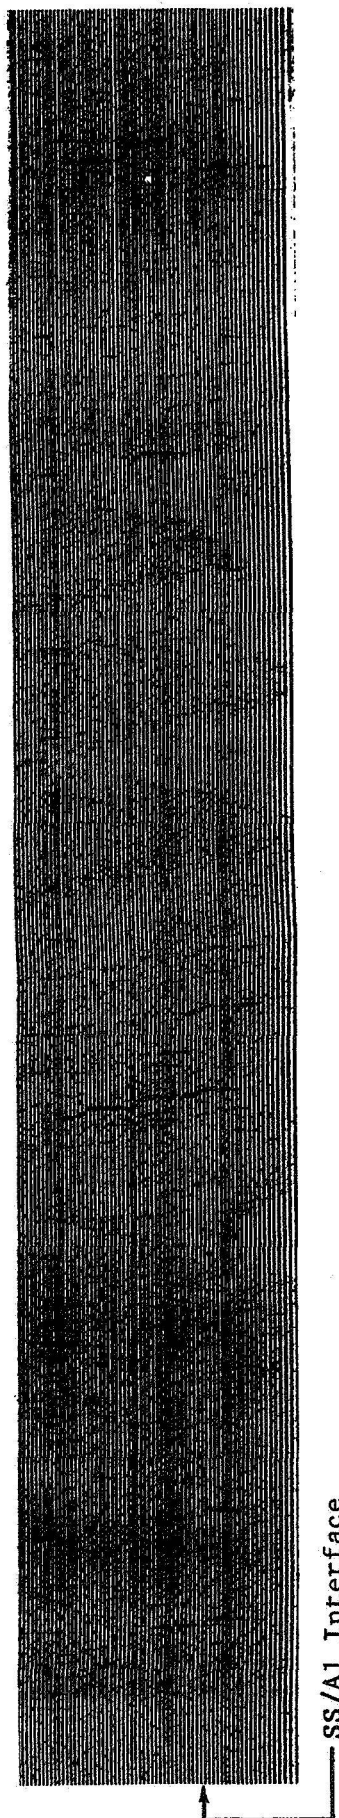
Ultrasonic Inspection Readout of Inertia Welded Joint-10,
